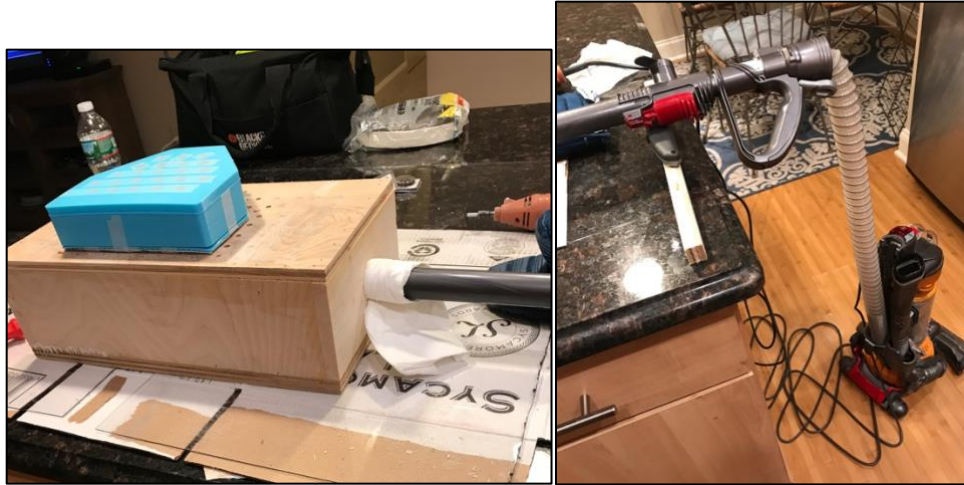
a) Left: Vacuum forming machine and b) Right: Attached vacuum
